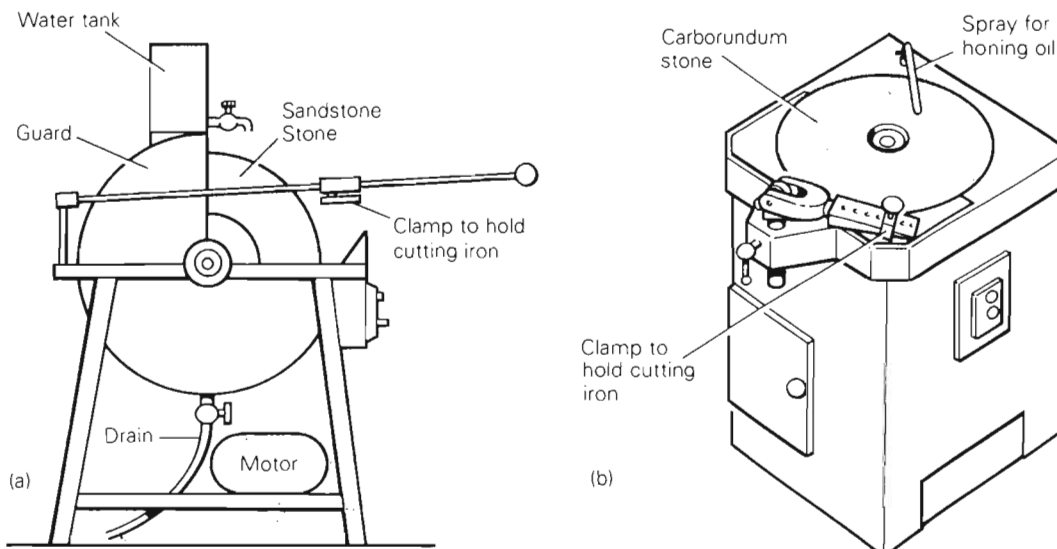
Grindstones: (a) sandstone type, (b) horizontal type.
